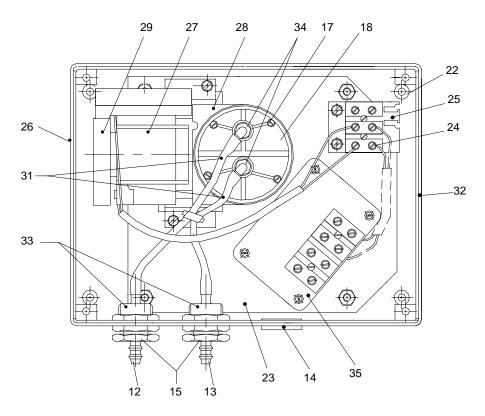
Diaphragm Pump Model 3N; with cover removed
